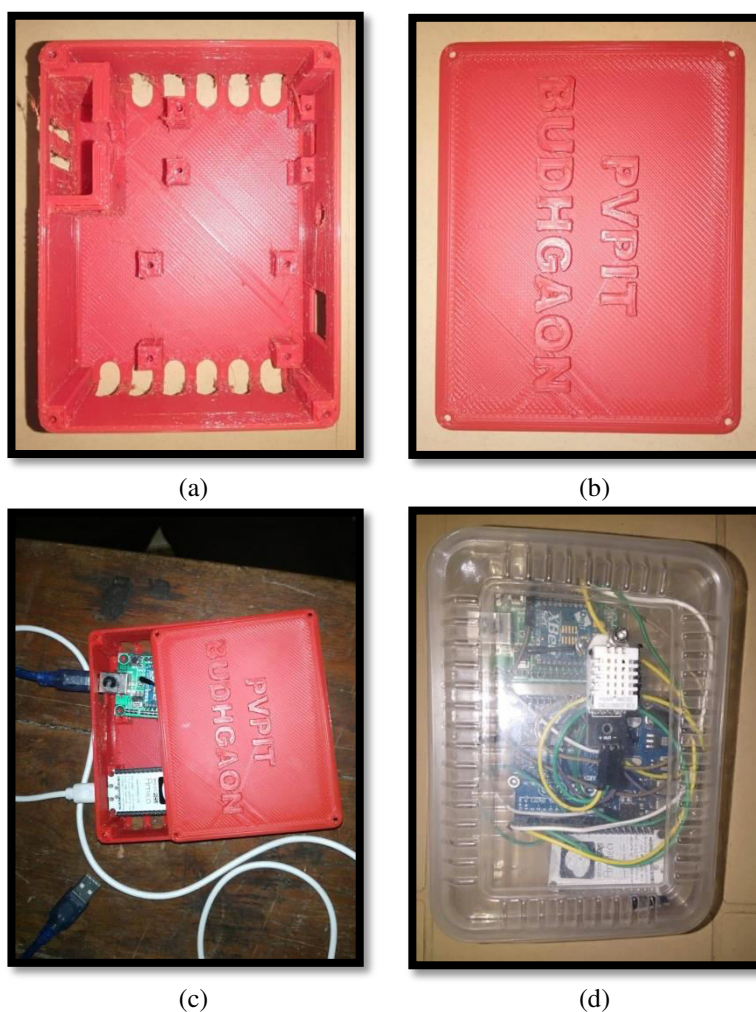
Comparison of real product assembled after 3D printing all its parts, (a) The main body of the enclosure; (b) the cover lid with text label (sticker); (c) the partially assembled IoT product [3]; (d) the partially assembled IoT product without customised enclosure [3].
